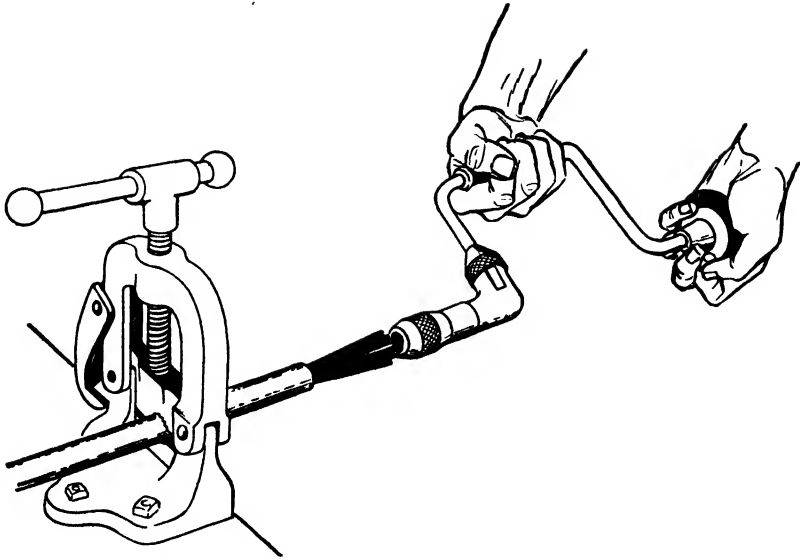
Reaming the inside of a pipe to remove the burr left by the pipe cutter. The burr may be removed with a round or half-round file if a reamer is not available.
